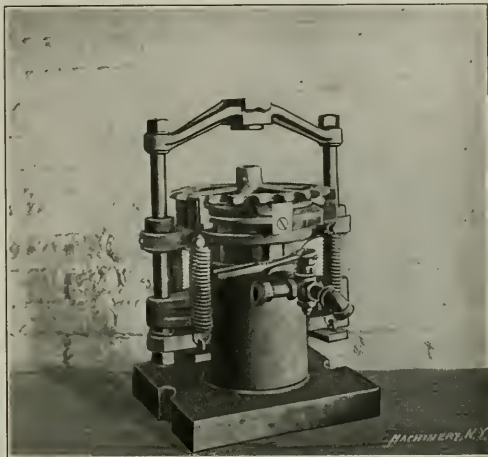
Pneumatic Clamping Jig for Sprocket Wheel.
